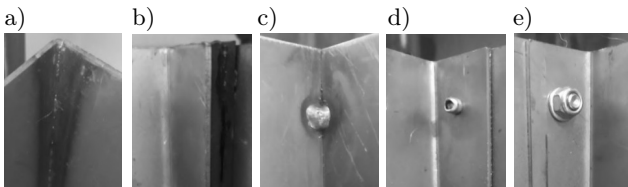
Technical junctions used to connect the plates: a) line welding; b) rubber connection; c) point welding; d) rivets; e) bolts.
